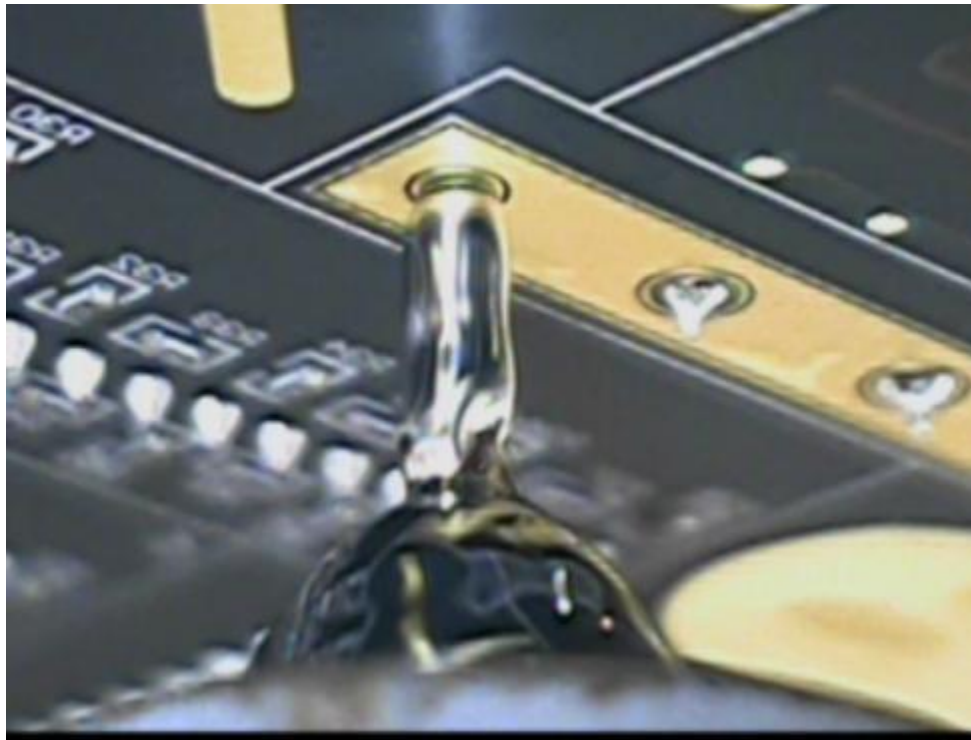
Small diameter nozzle soldering within the tight clearance of a metallized zone.
